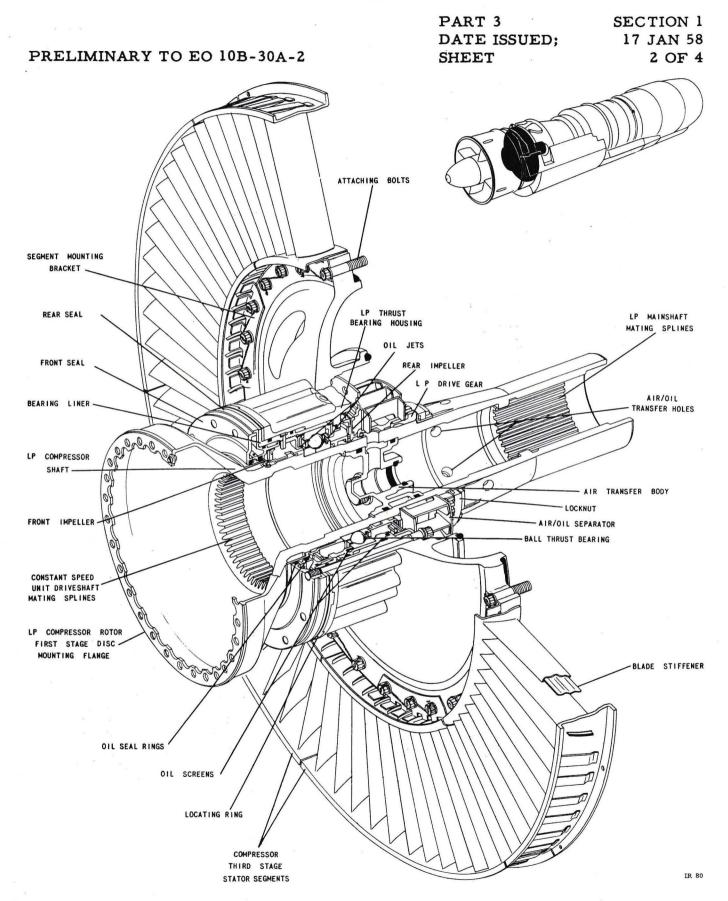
(Issue 1) Low Pressure Thrust Bearing Assembly
